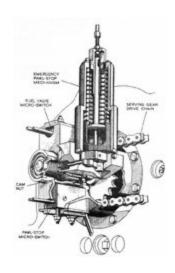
Mk XI hose-drum unit, microswitch assembly
